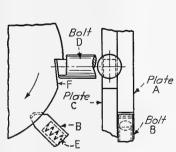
Plates A and C are fastened together, the former accommodating the bolt B, whereas plate C is positioned by bolt D. Rotated in direction of arrow, bolt B slides into slot in plate A, one side being milled to 20 deg. When indexing begins and bolt D is pulled away, 45-deg. slot in plate A pushes out the bolt B, both bolts then riding on periphery of respective plates, and bolt D sliding down the easy incline F to a predetermined depth.
